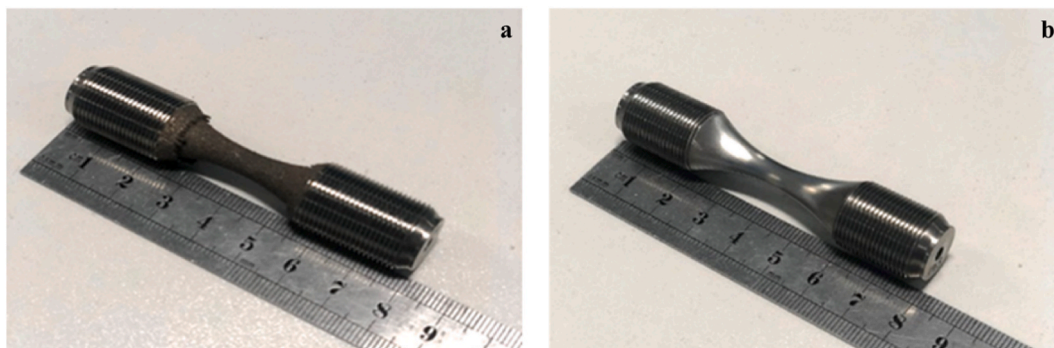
EBM Ti-6Al-4V HCF samples a. as-built, and b. machined & polished surface finishes.
